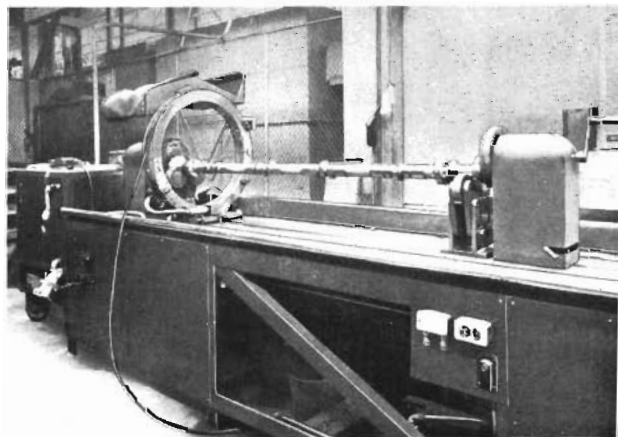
Camshaft Magnaflux Inspection
